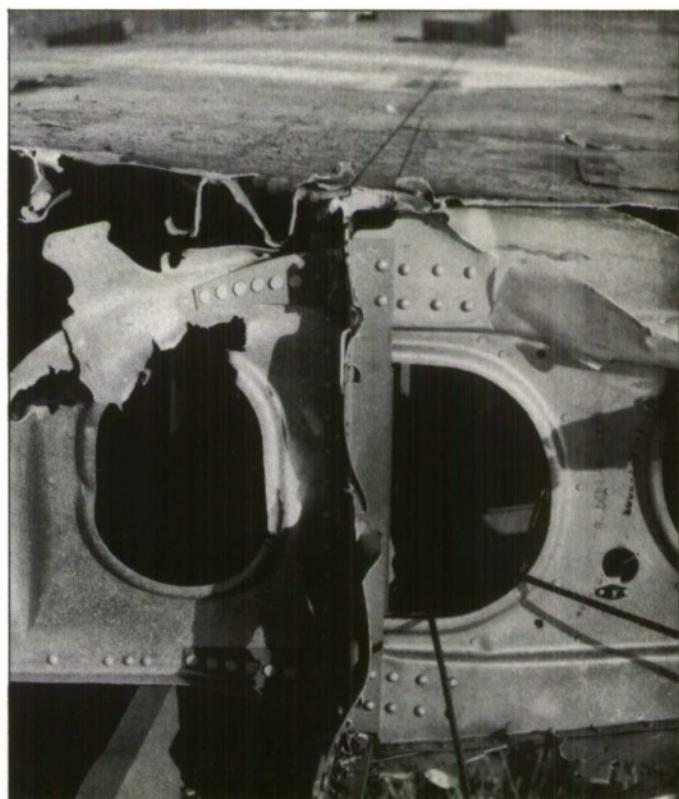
FIRING 5. DAMAGED OUTER WING STUB LOOKING
